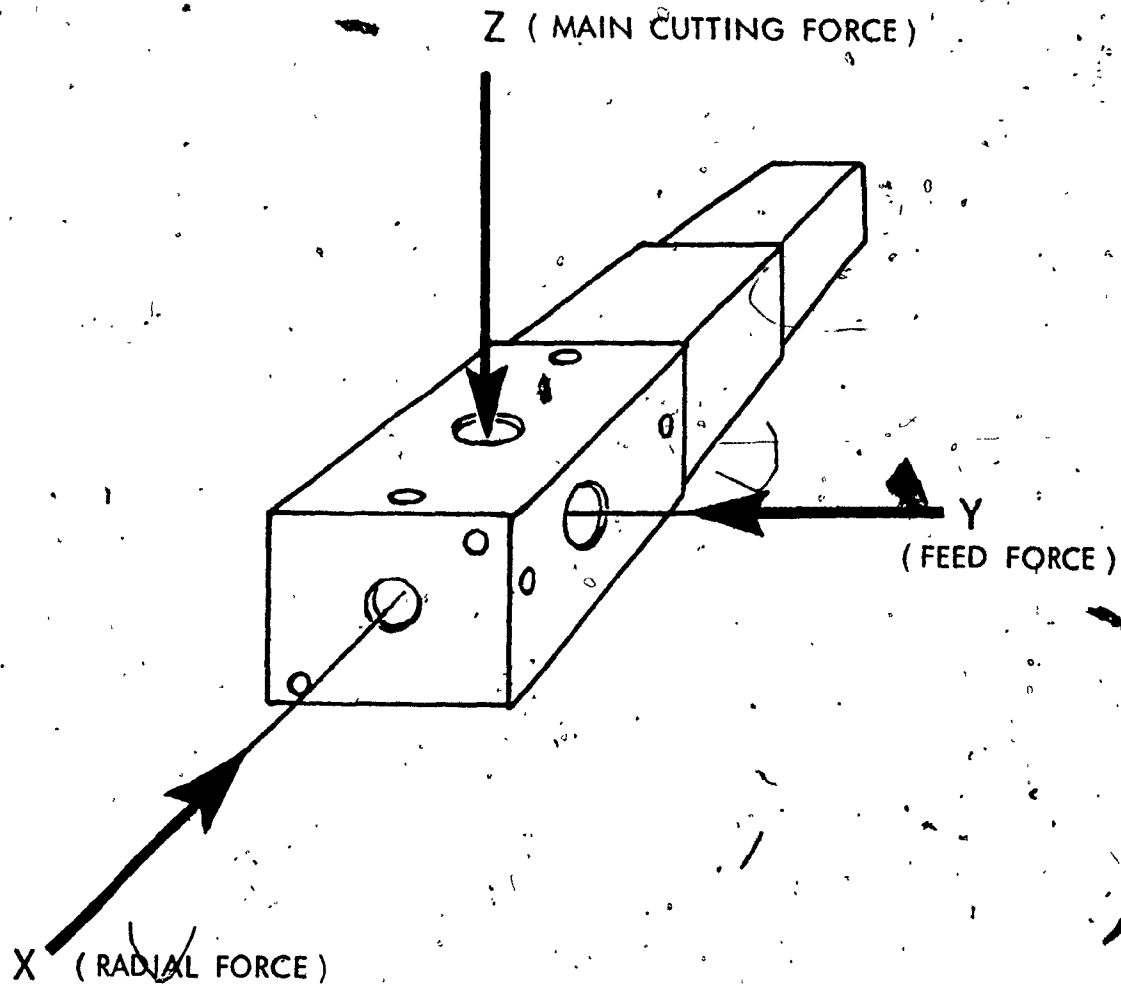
SPECIAL TOOL HOLDER FOR APPLYING UNIAXIAL LOAD
